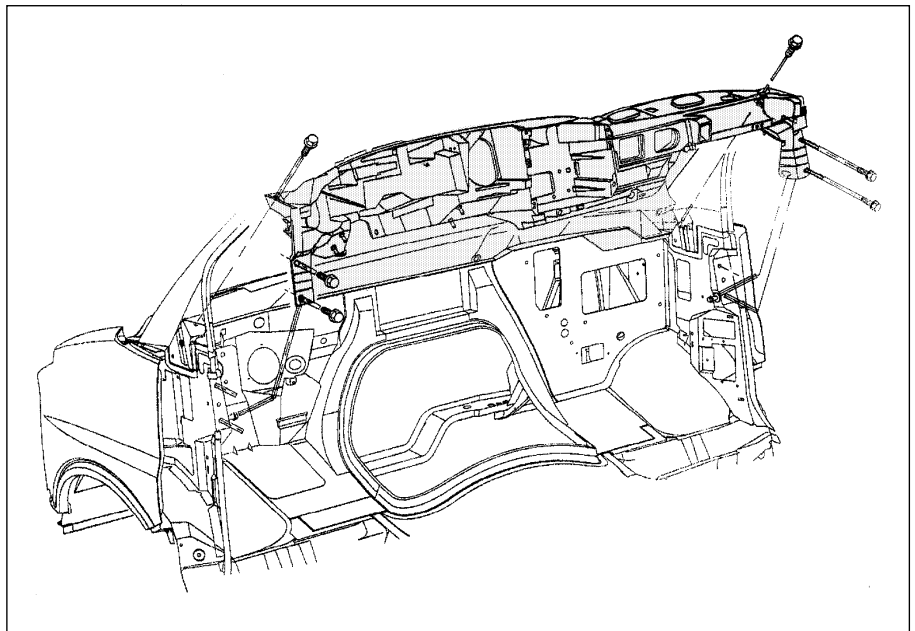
The magnesium instrument panel carrier is a cross-vehicle beam, and part of the vehicle's passenger crash protection system. (Courtesy of GM)
